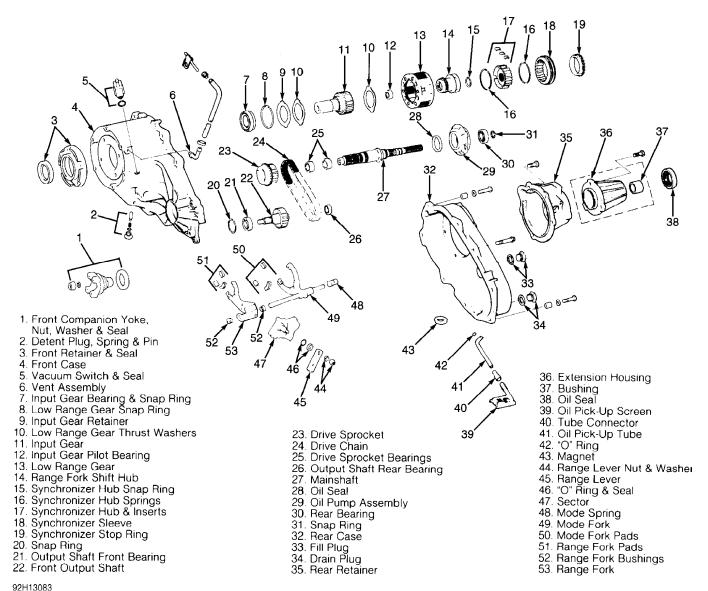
Exploded View Of Transfer Case (Model 207) Courtesy of Chrysler Corp.
